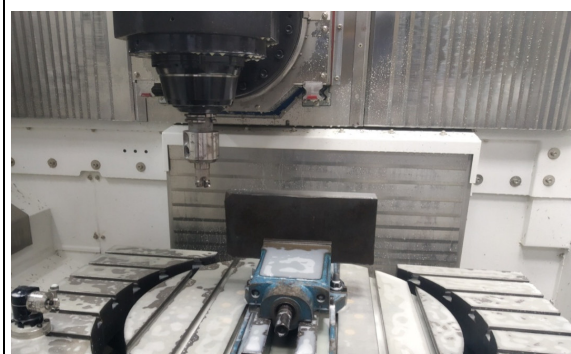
Side milling of the workpiece on 5-axis Milling machine
